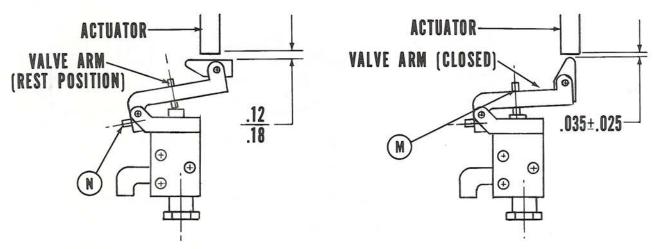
B - RESET VALVE, PUSHER CYLINDER VALVE, CARRIAGE RETURN VALVE - SIDE VIEW
